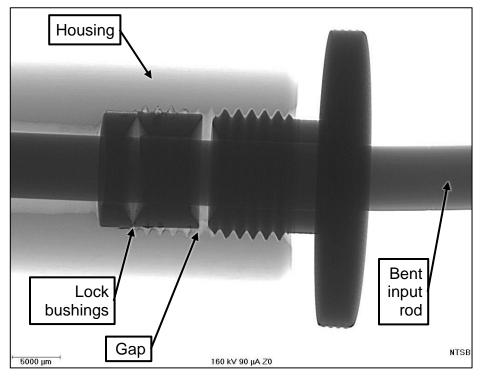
Radiograph of the lock mechanism at the input end of the control housing showing a gap between the lock screw and the lock bushings.
